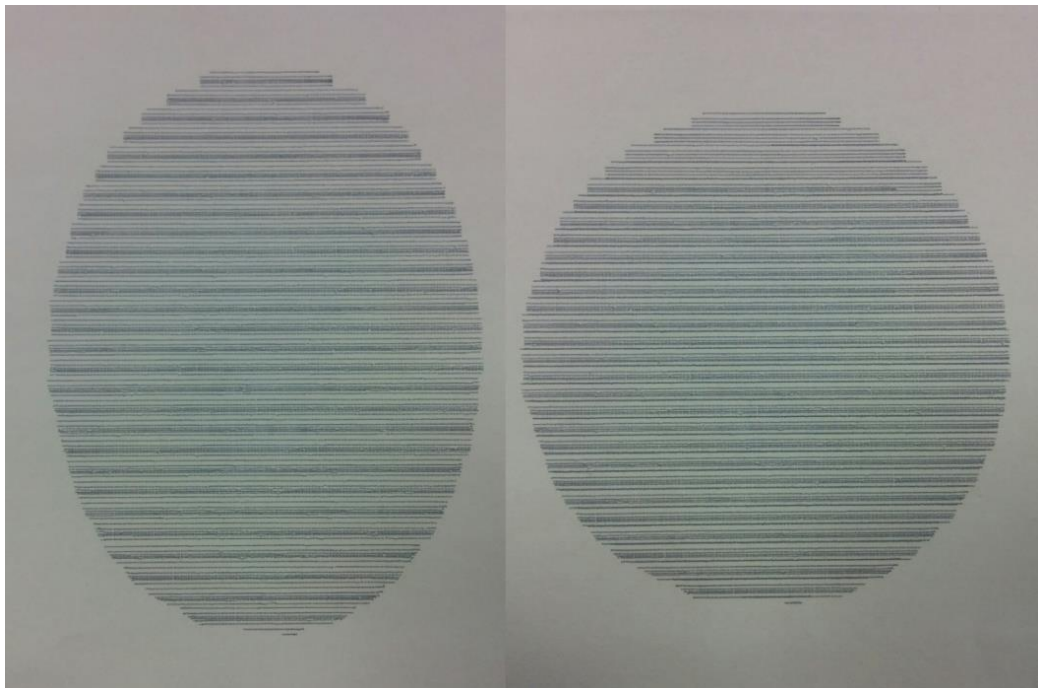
Initial test print onto paper of a circular shape. Left shows Y axis error with elongated part, right shows corrected print
